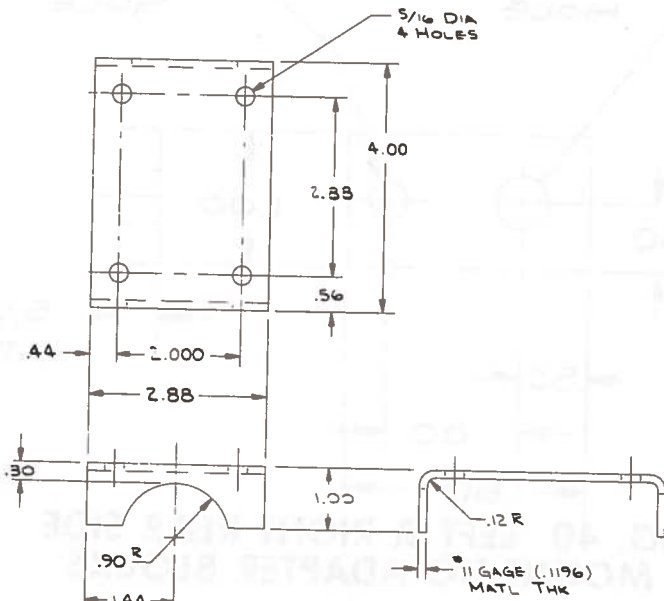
BOTTOM PANEL REAR MOUNTING BRACKET
